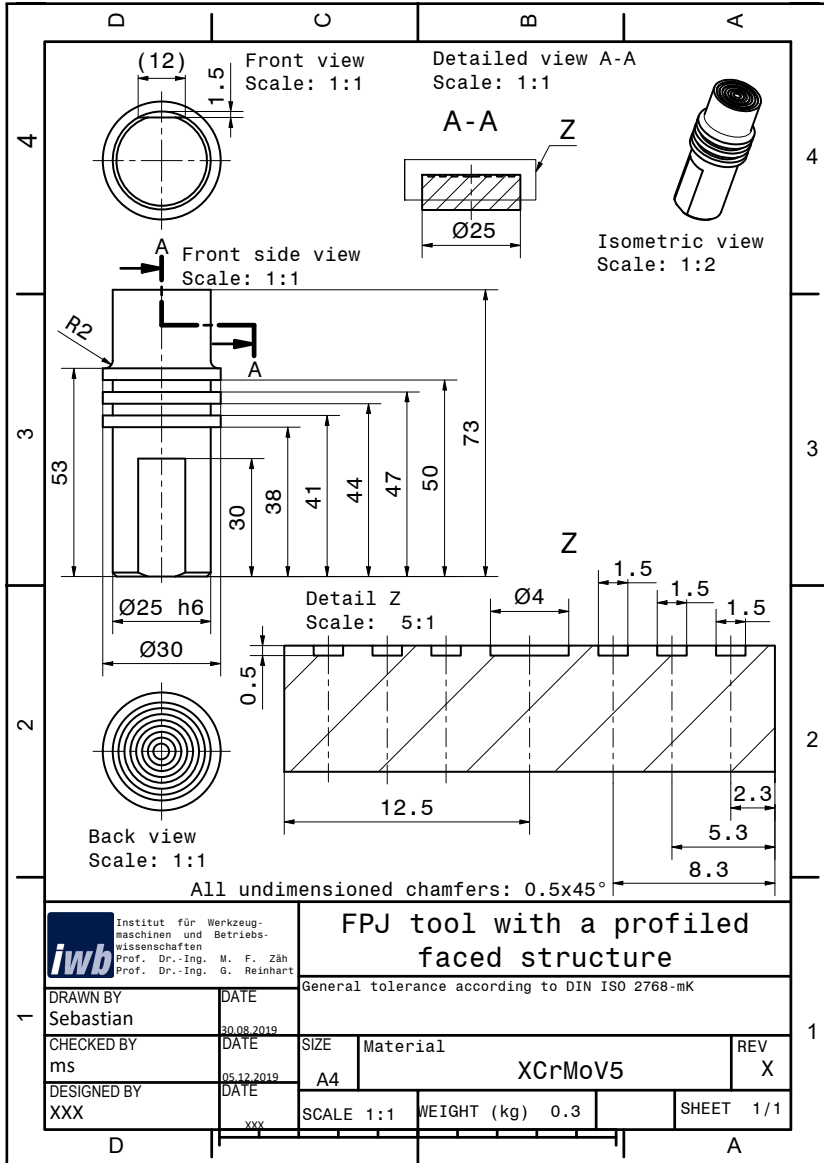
Engineering drawing of the FPJ tool with a profiled friction surface (grooves)
